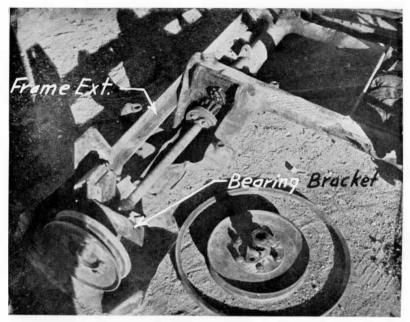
Power drive shaft with flexible connection on pitman bevel gear, roller bearing pulleys and belt.
